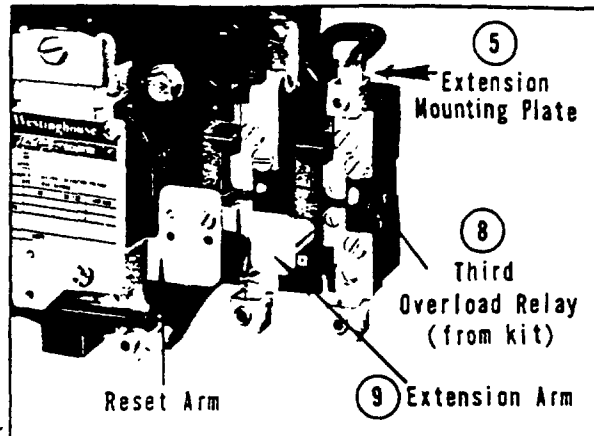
Relays Mounted on Extension Mounting Plate. Extension Arm in Place.
